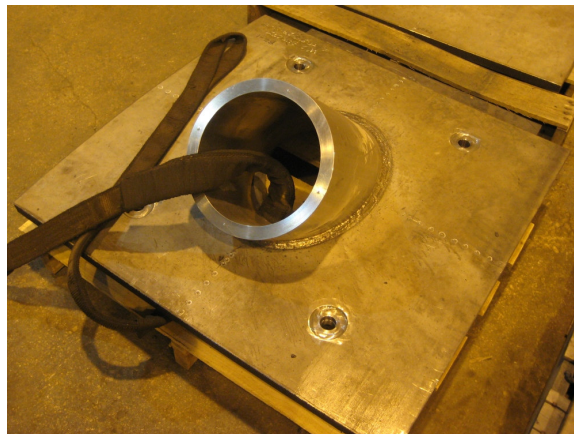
Completed Single Nozzle Weld Mockup Welded with Contour Fixture
